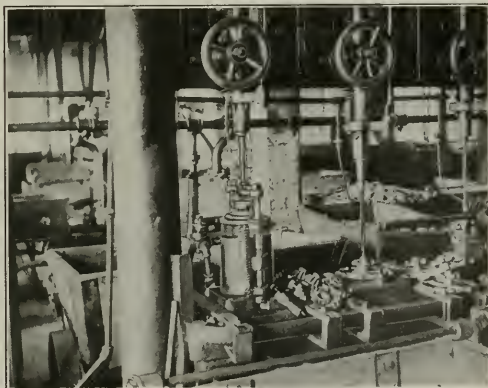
Clamping Jig in Use, with Pinion Centering Device.
